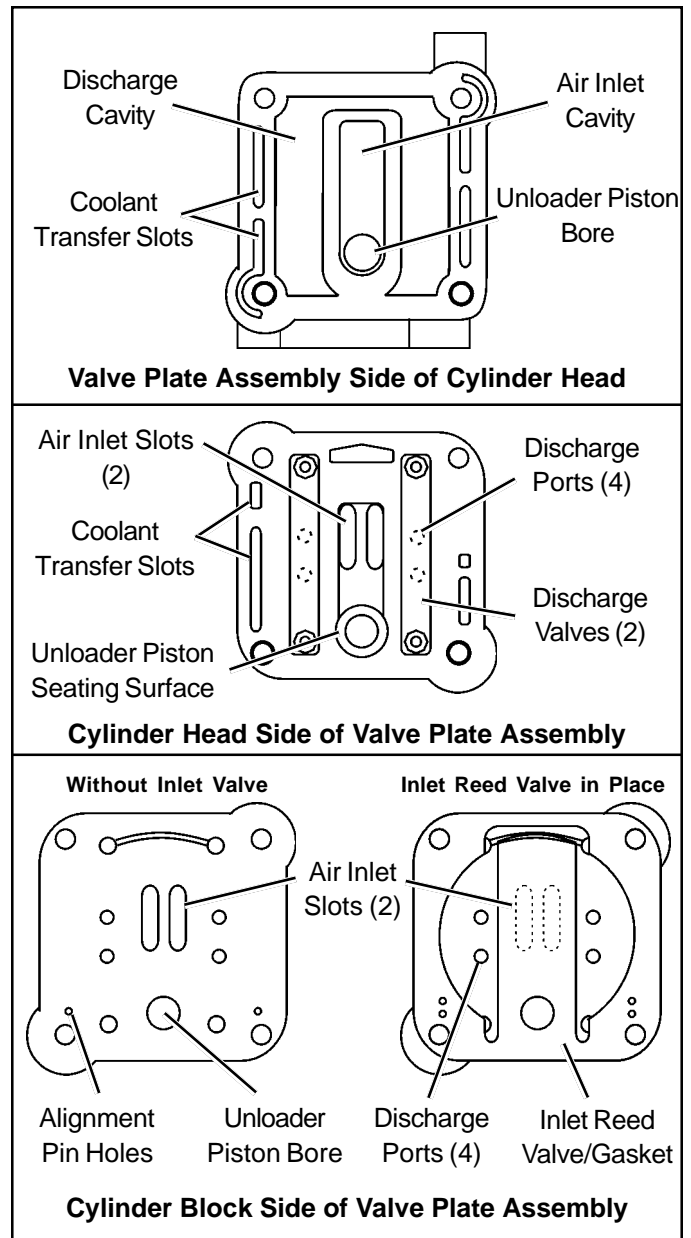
CYLINDER HEAD AND VALVE PLATE ASSY.
